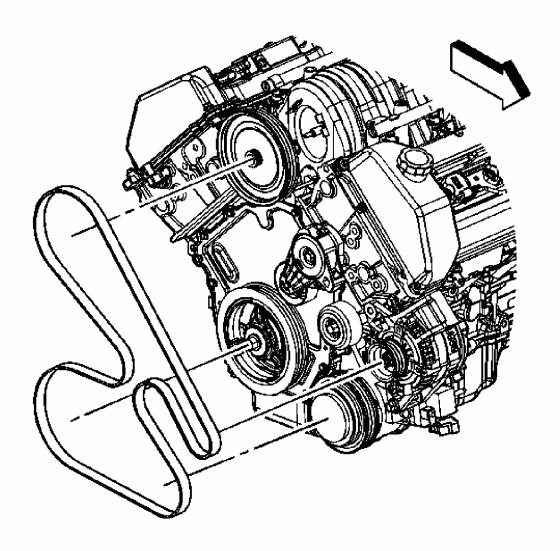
Identifying Drive Belt Courtesy of GENERAL MOTORS CORP.
